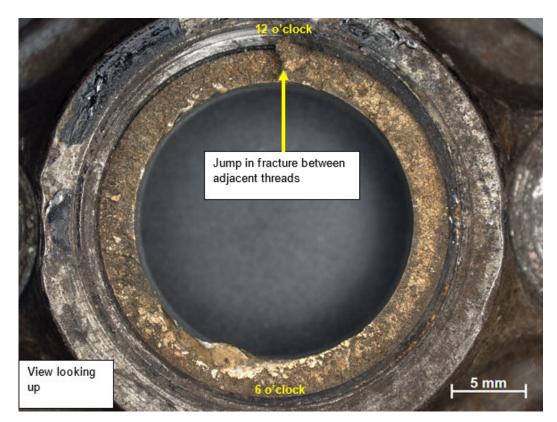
Fracture surface of the oil pipe at root of thread
